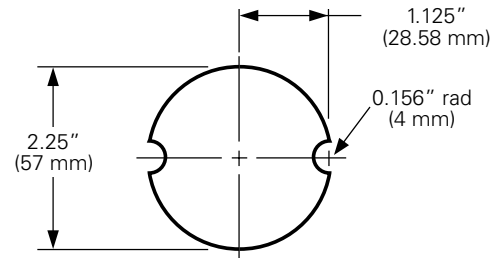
Tank mounting hole for sidewall-mounted assembly.
